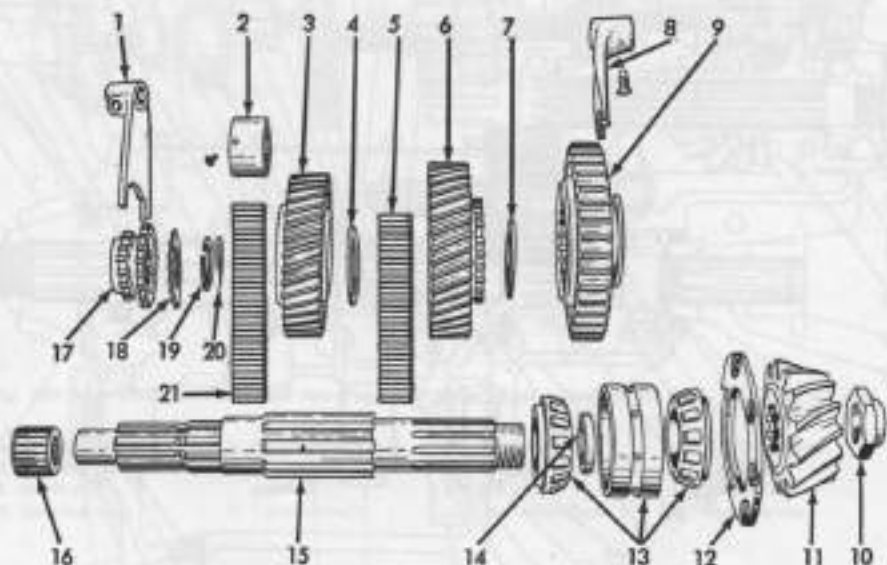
Early model transmission main shaft—Models 55, 55K, 55LP, 55D, 201, 202, 203 and 203G. Later models are similar except rear bearing cup is now 2 pieces.
